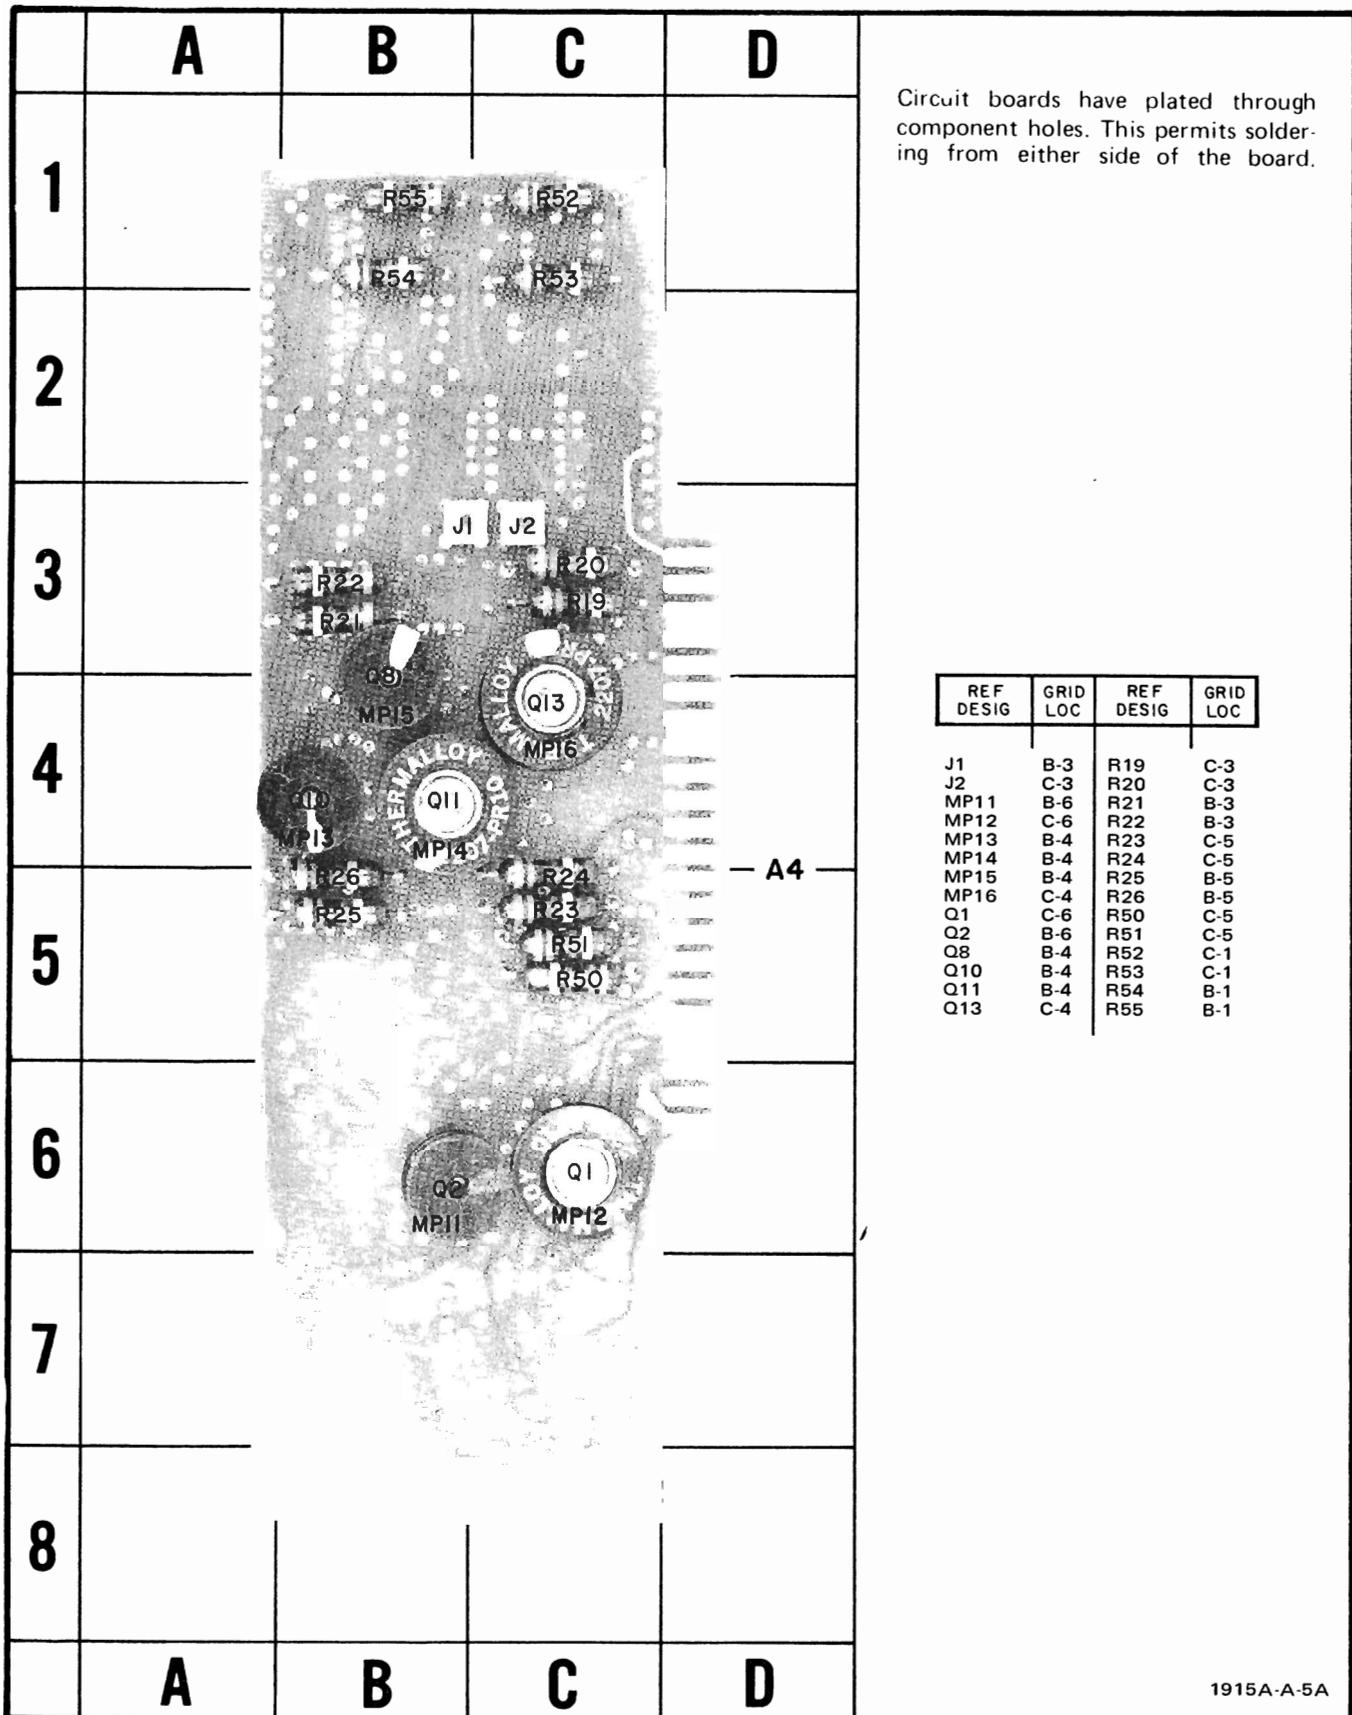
Positive Output Assembly A4, Component Identification (Rear View)
